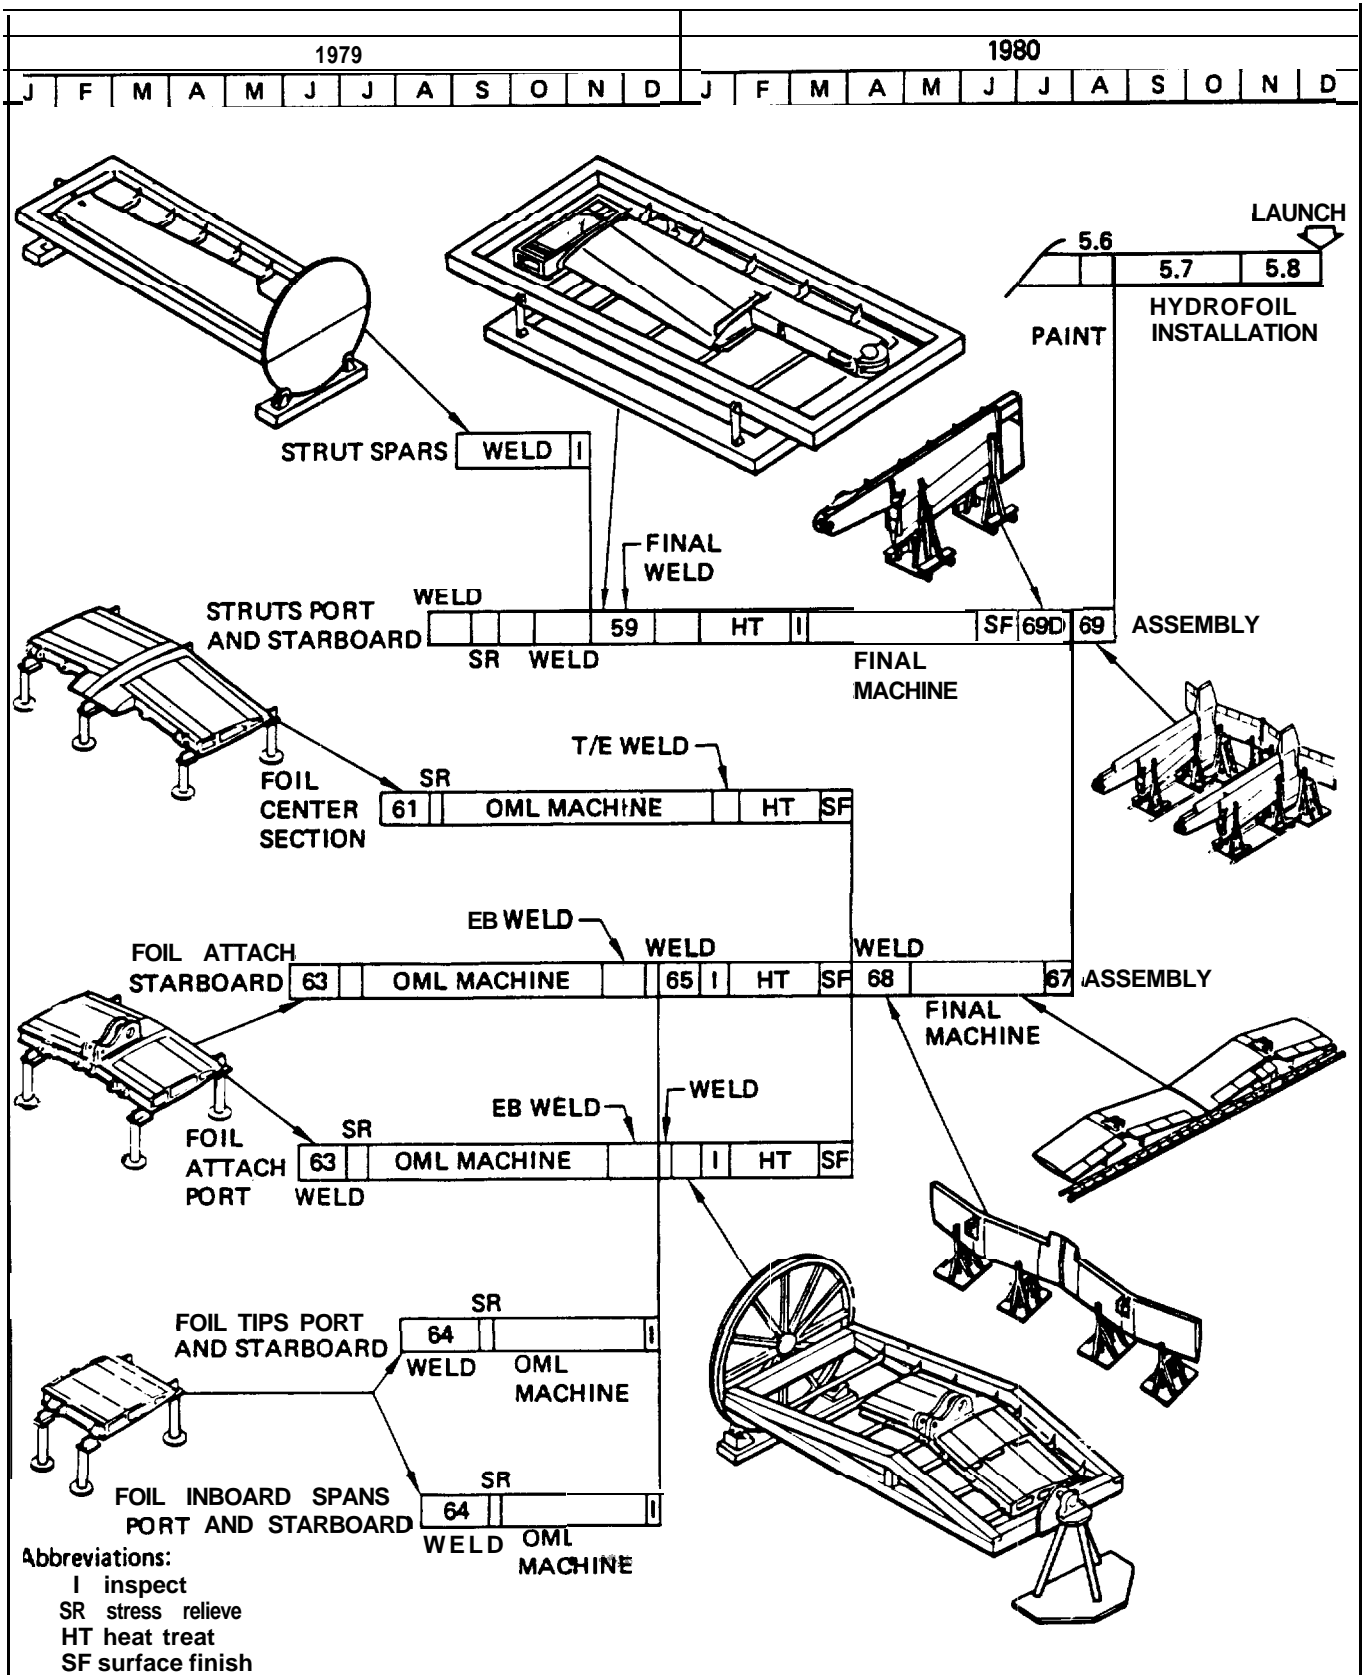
PHM-3 Aft Strut and Foil Production Assembly Schedule
